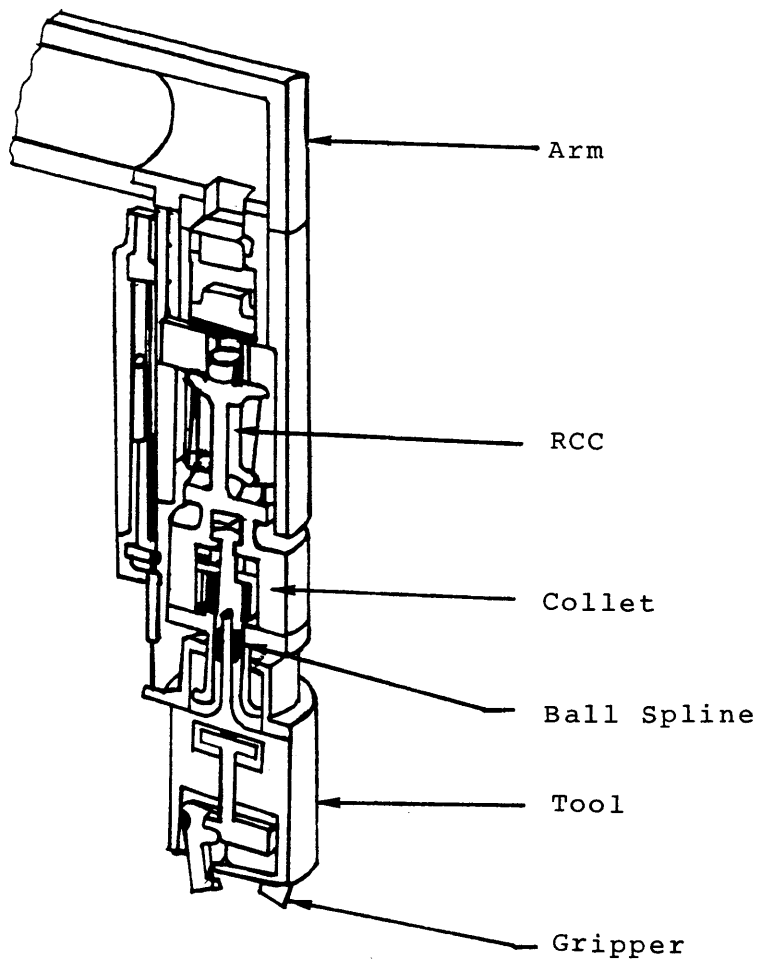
Arm/Tool/Collet/Tool Assembly
